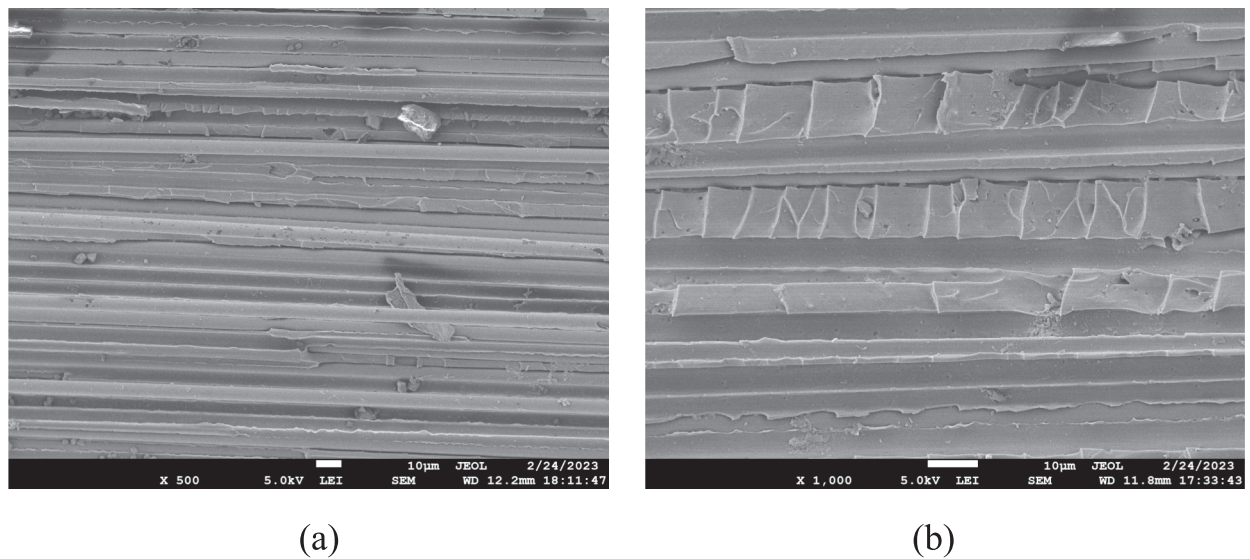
Fractographic examinations on fracture surface of -40°C. (a) 500X; (b) 1000X.
